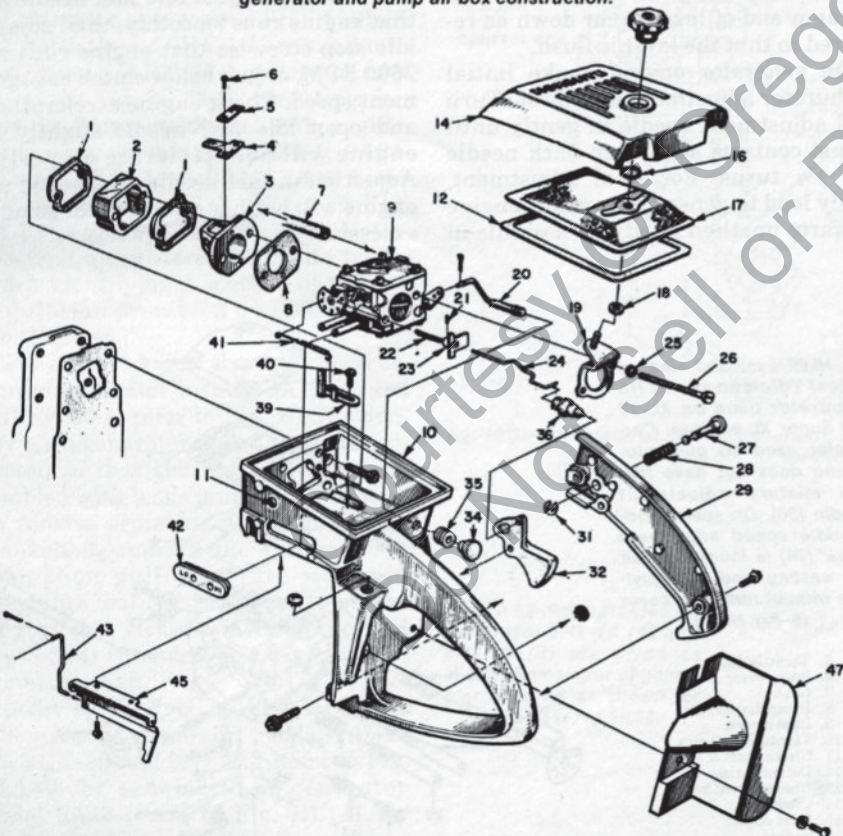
A—Exploded view of model XL-120 air box and handle. Late model XL-100 is similar except that a flat reed intake valve is used as shown in Fig. HL61. Note the Super XL engine pyramid reed valve assembly (items 1 through 6). Tension of governor spring is adjusted by loosening screw (40) and moving speed adjusting plate (39); refer to text.
